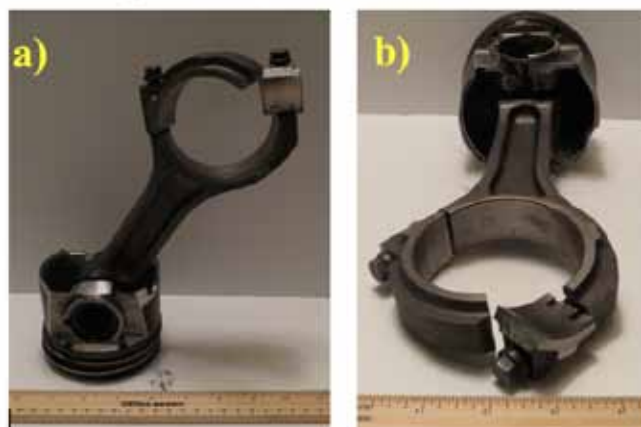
As-received documentation of the piston connecting rod assembly: a) front facing view; b) longitudinal top view
